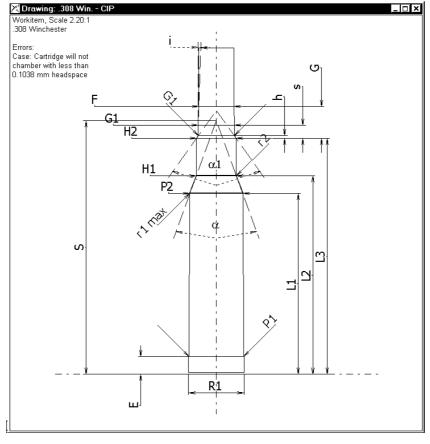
Cartridge Outline Drawing with Metrics and Dimensions
